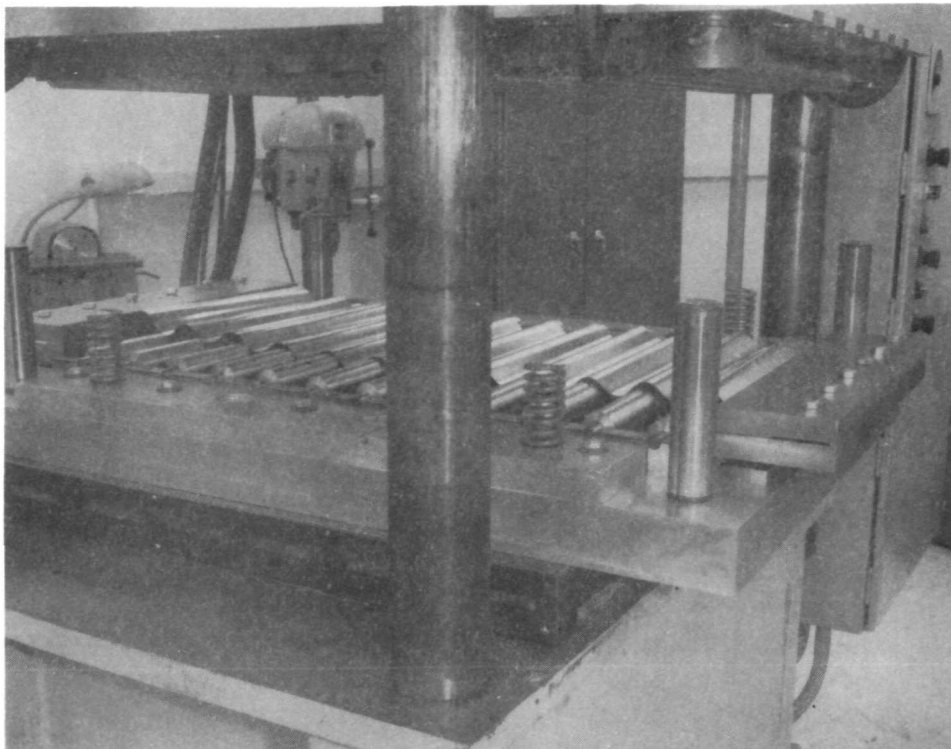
Bottom and Top Half of the Web Forming Die Set in a 100-Ton Dake Press, with Formed Piece on the Lower Die
